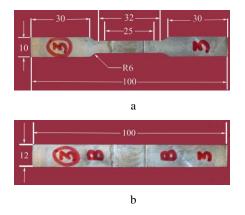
Photographs: a-tensile specimen (ASTM E8M-04 standard); b-bending specimen (ASTM E290-08 standard)
